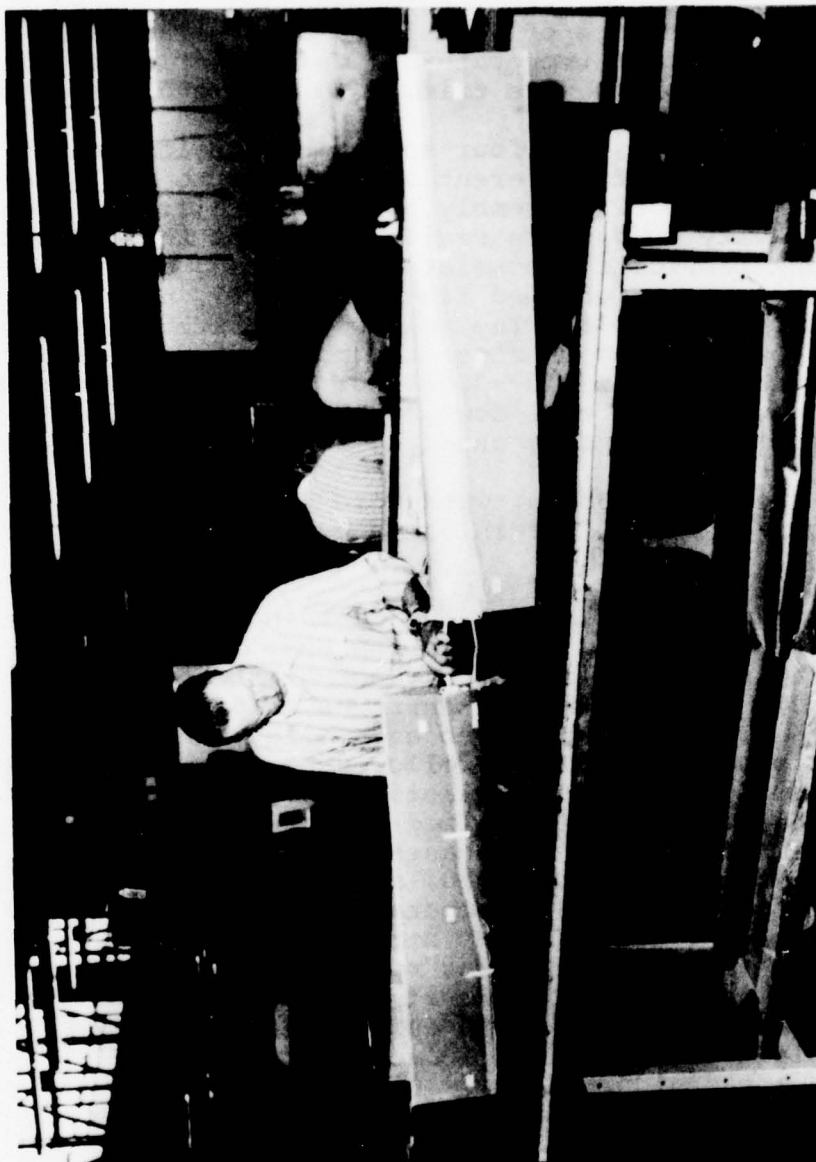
Elastic pitch beam tail rotor after removal from airfoil section assembly bonding fixture.
